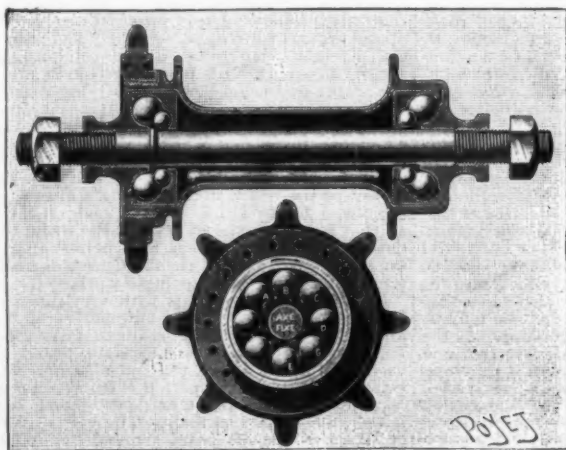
BICYCLE HUB WITH BALL BEARINGS.
